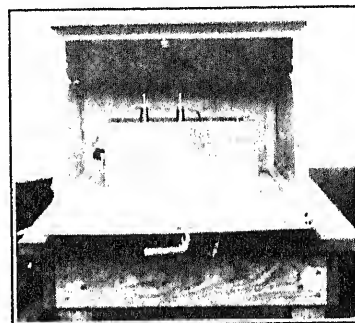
SHEET METAL HOUSING FOR SURGE VOLTAGE RECORDER
